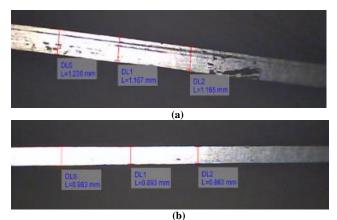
(a) PCB line etching based on ordinary resistor, and (b) PCB line etching based on PTC heater.
